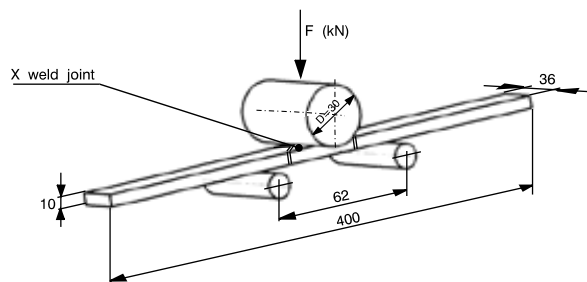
Shape and dimensions of side flat specimen and a mode of specimen bending
